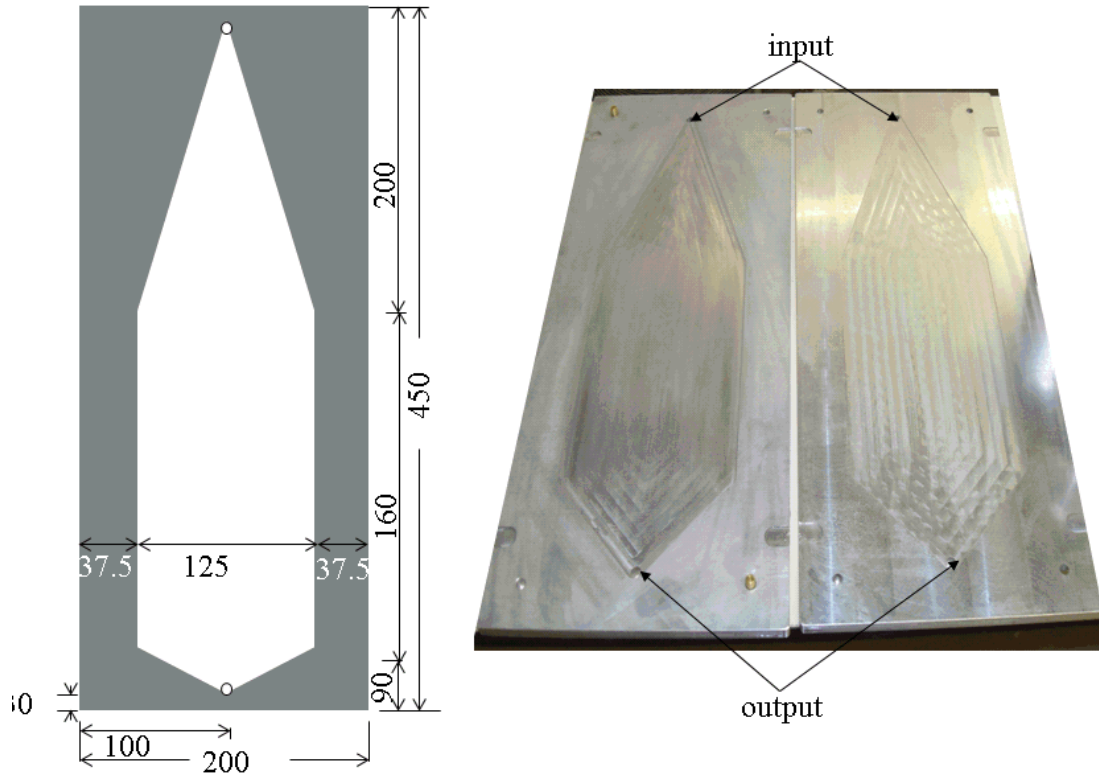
Mould for preparing GFRP custom plane sheets (a) the design of a single mould with dimensions, and (b) two identical plates of the mould.
